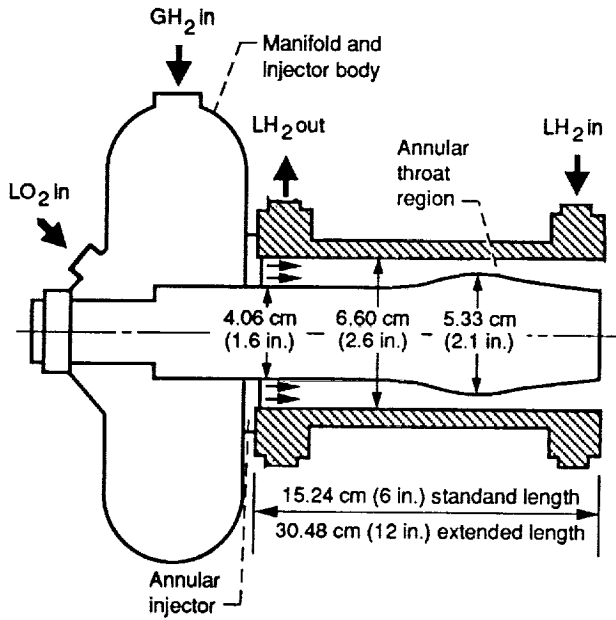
Schematic of cylindrical thrust chamber assembly.
